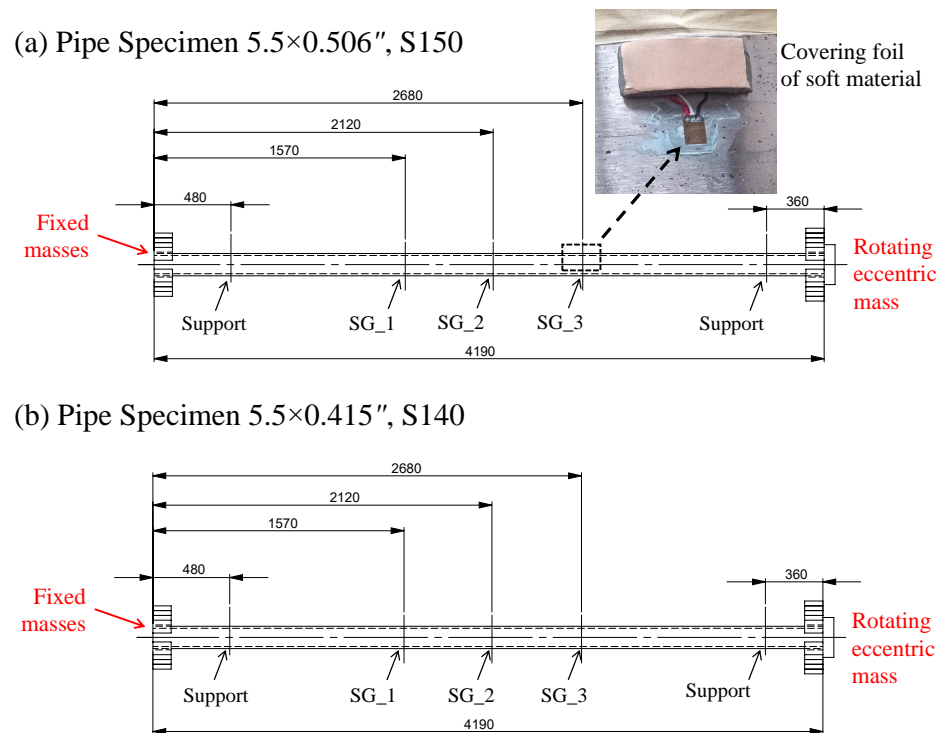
(a) Drill pipe specimen 1, 5.5 × 0.506" and (b) drill pipe specimen 2, 5.5 × 0.415".
